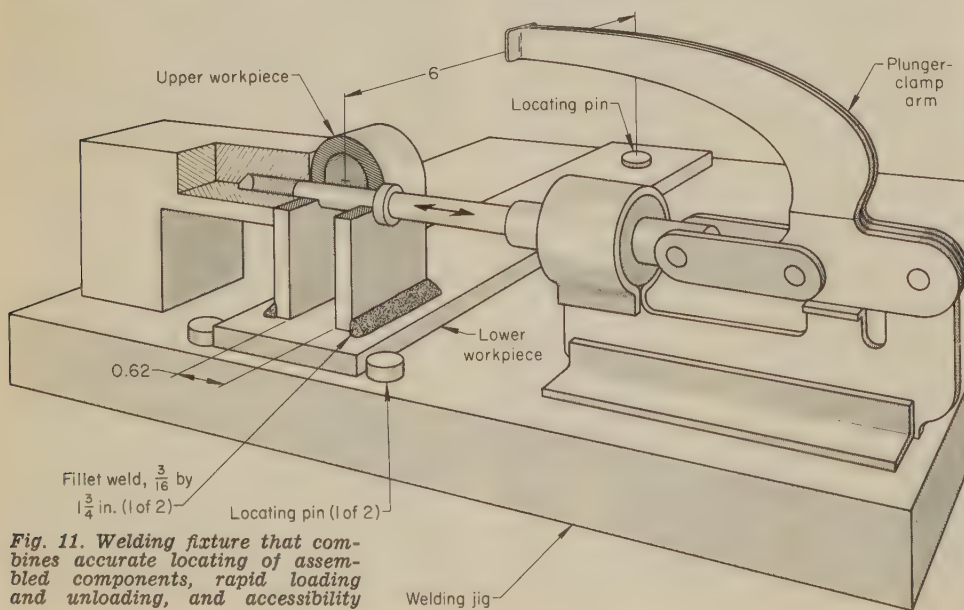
Welding fixture that combines accurate locating of assembled components, rapid loading and unloading, and accessibility
